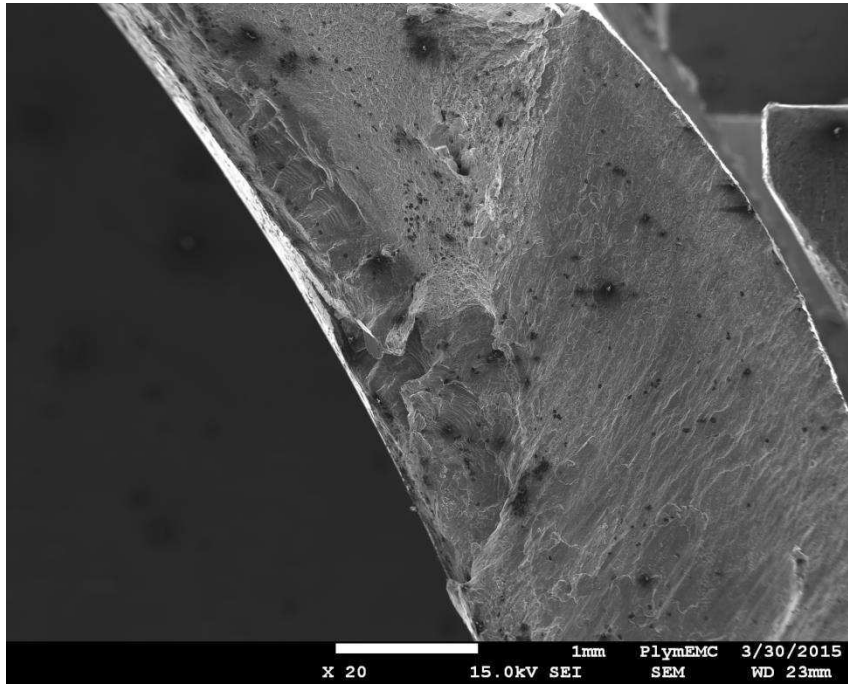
Clear evidence of initiation of the primary fatigue crack from the outer edge of specimen IPh2 can be seen at the upper right hand corner in this image.
